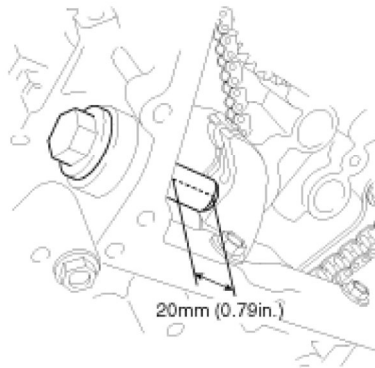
Identifying Distance Between Cylinder Head Surface & End Of Tensioner Plunger (1 Of 2)
